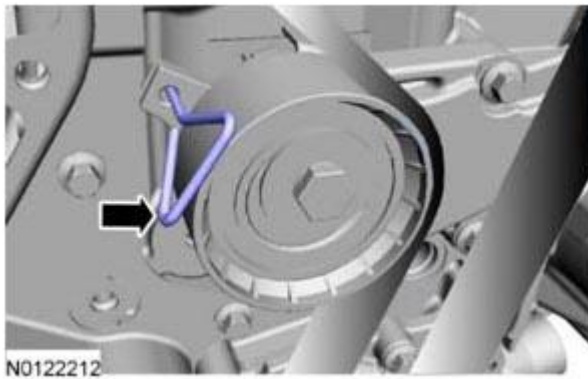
Locating Timing Belt Tensioner Holding Tool
